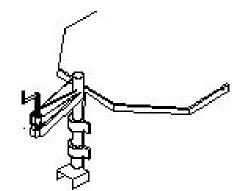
Furnace Cover's Opening/Closing Mechanism (All dimensions are in mm)
